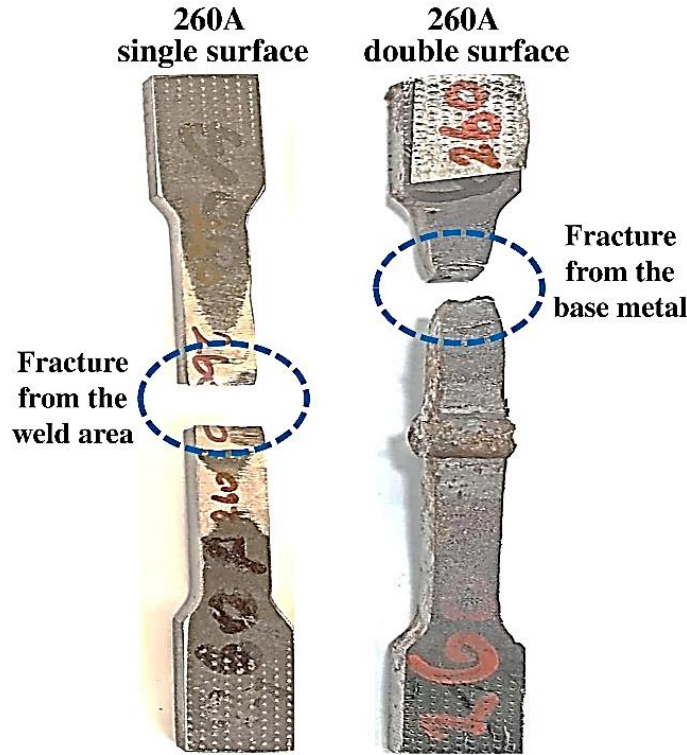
Macro view of fracture after tensile testing of single-sided and double-sided welded specimens at 260A welding current (260A kaynak akımında tek taraflı ve çift taraflı kaynaklı numunelerin çekme testinden sonra kırılmanın makro görünümü)
